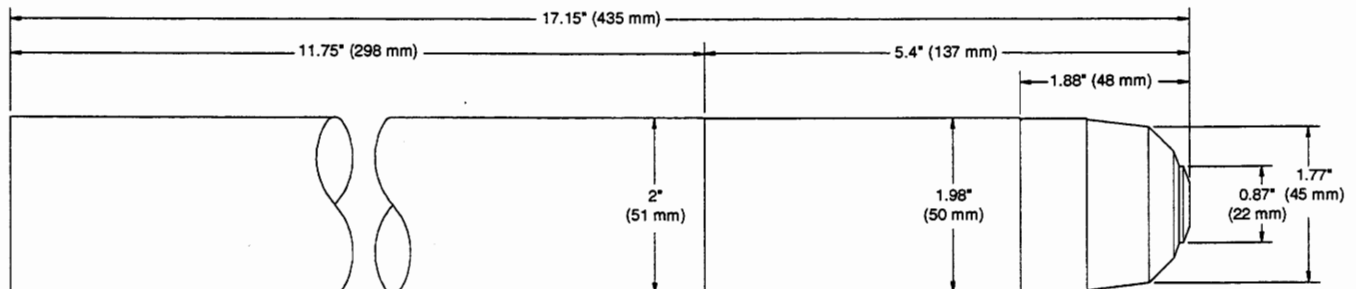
PAC620 Standard Torch Assembly with Dimensions
